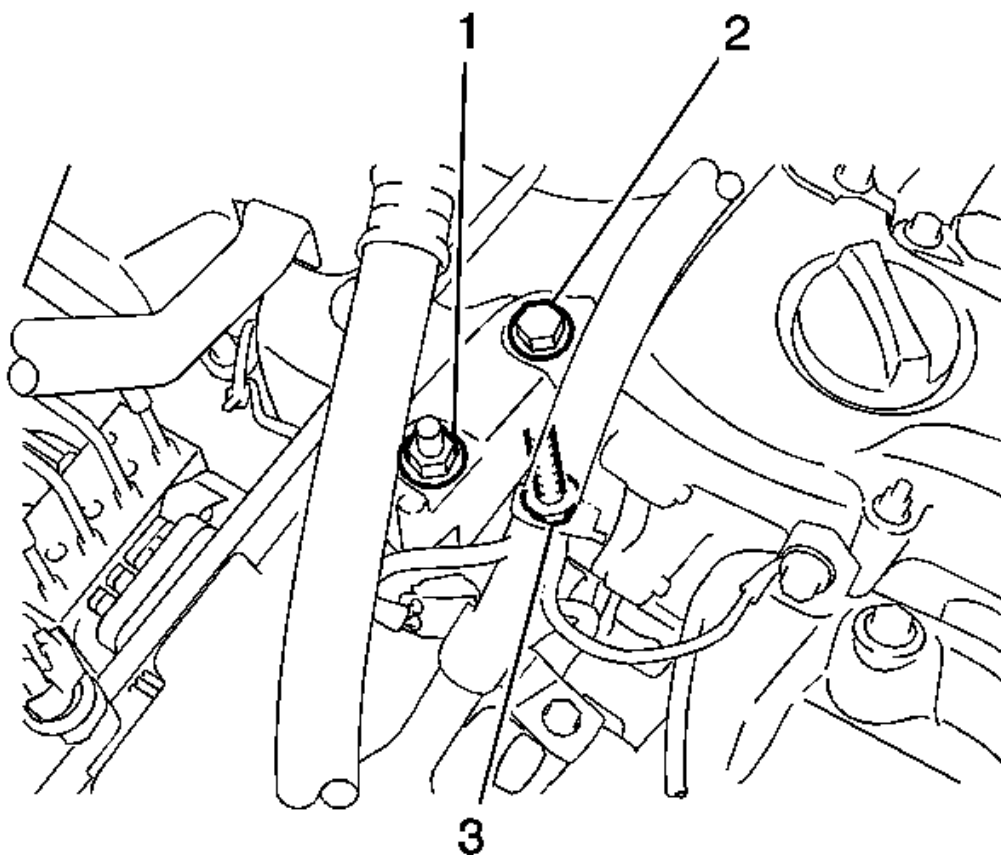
View Of Right Engine Mounting Insulator, Bolt & Nuts
